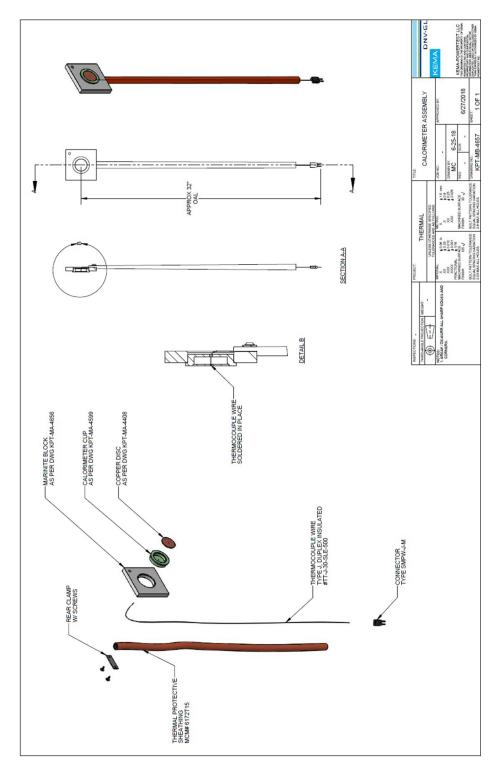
Drawing KPT-MB-4657, ASTM Calorimeter Assembly.
